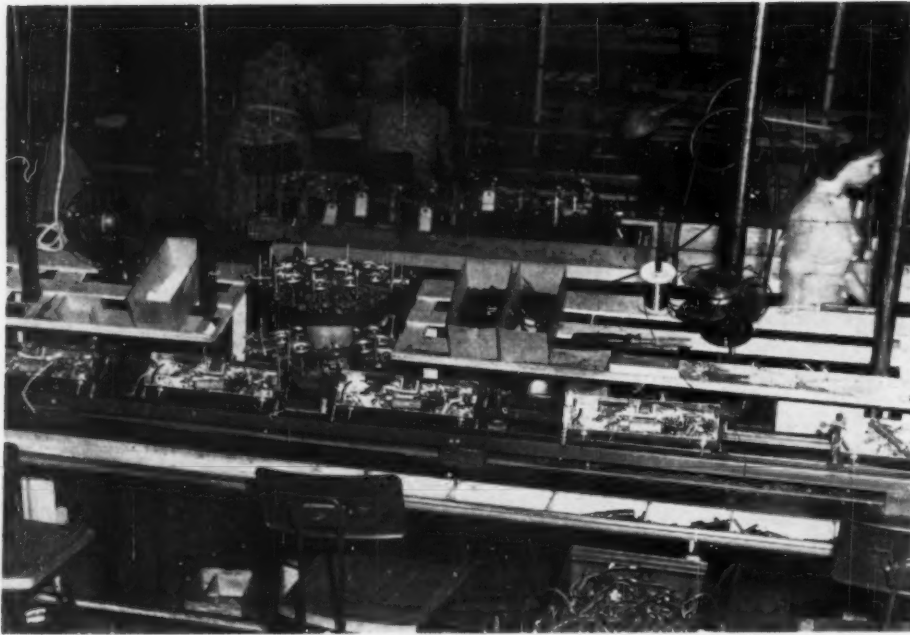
TRACK AND POSITION SYSTEM APPLIED TO RADIO-CHASSIS ASSEMBLY
